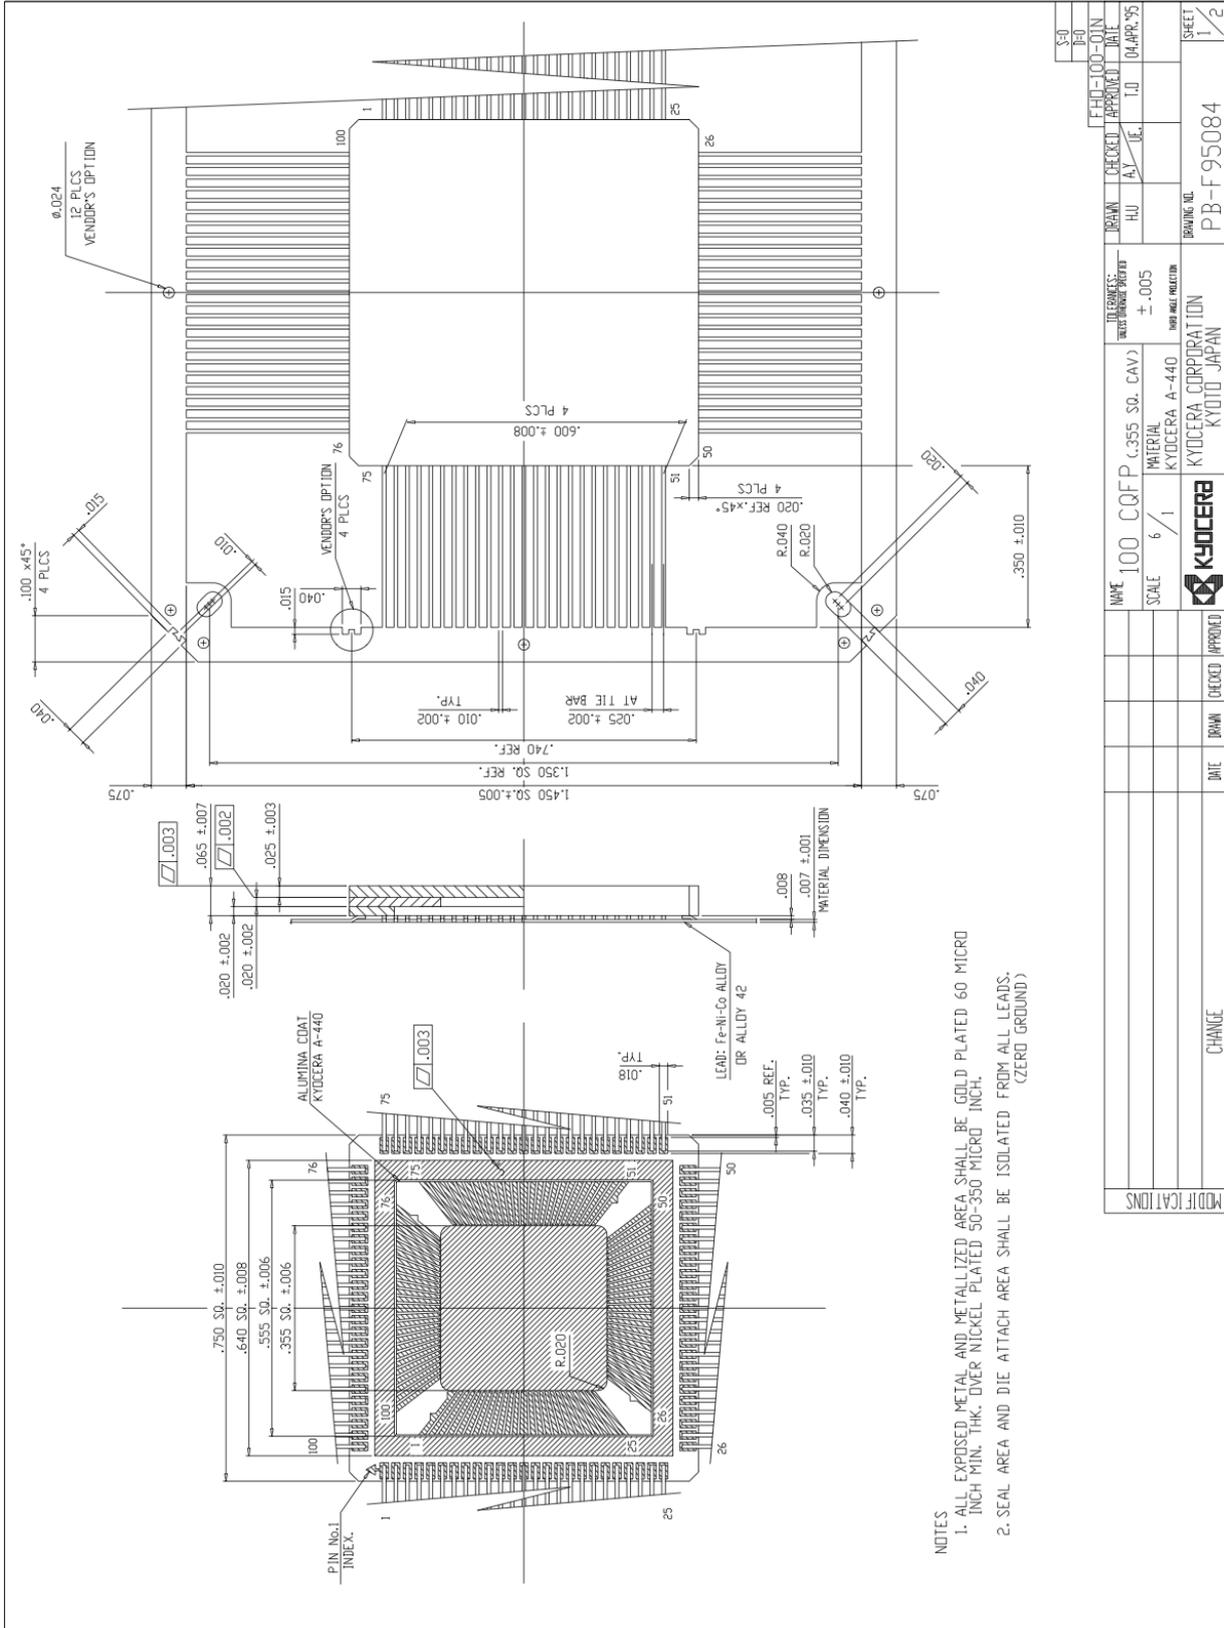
SIF2 (8 channel configuration) 100 pin package drawing.
